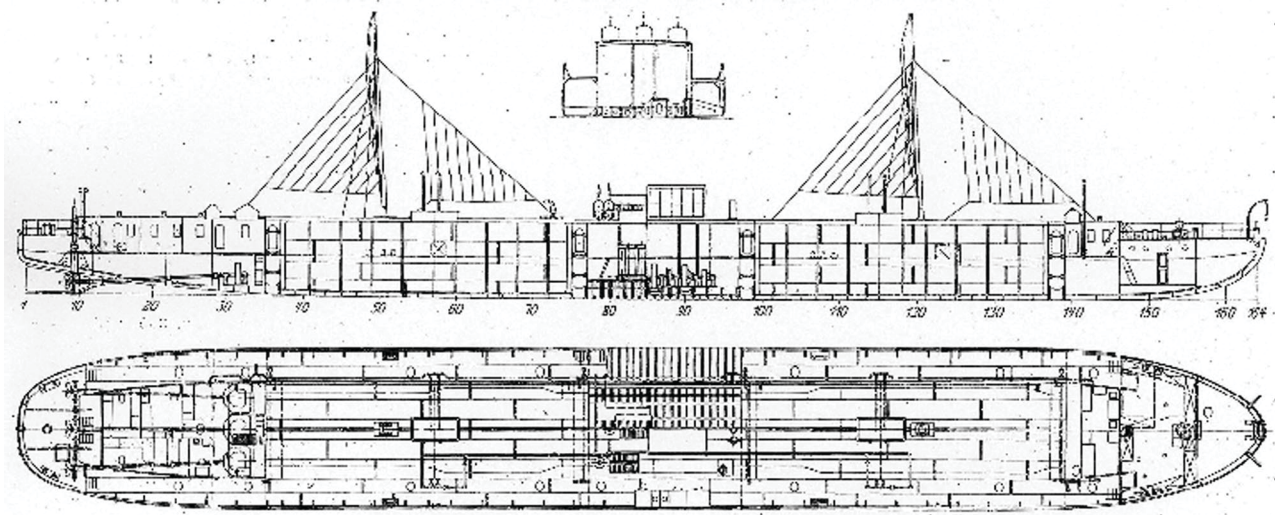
River tanker VANDAL (mechanical drawings), 1903.
